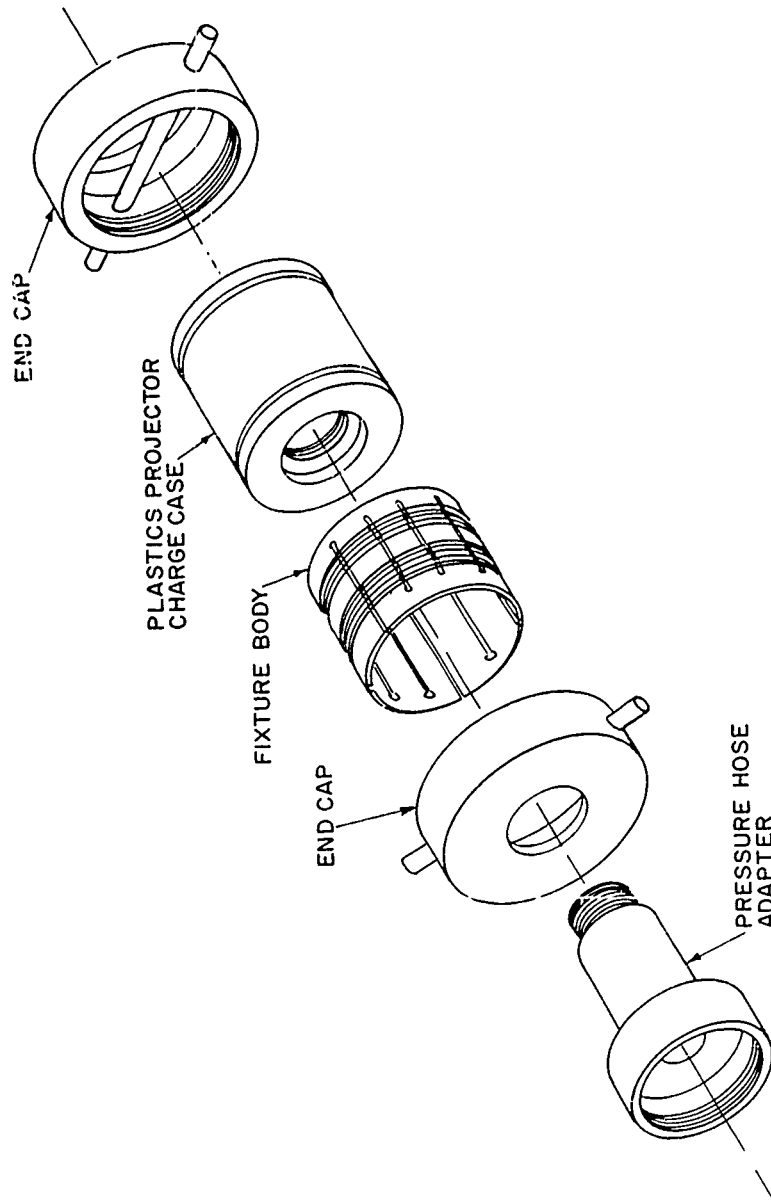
SPIN WELDING TEST FIXTURE FOR PLASTICS PROJECTOR CHARGE CASE
